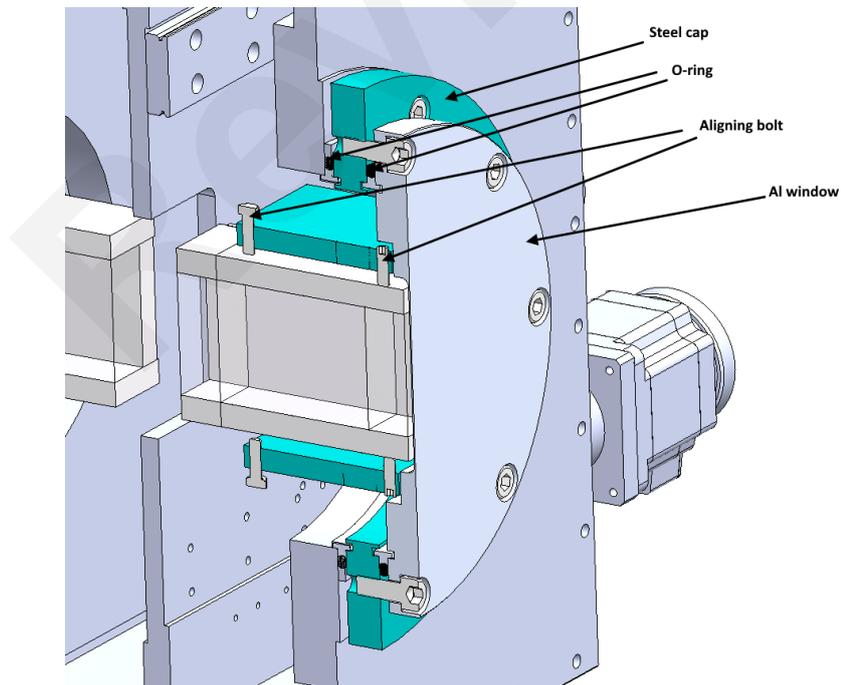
Section view showing the construction of the mini-guide alignment in SL2.
